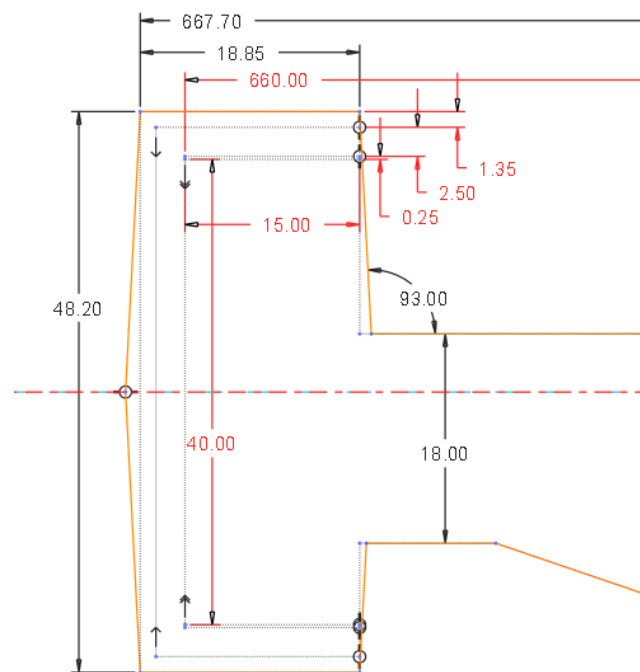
RMA and tolerance contribution to casting nominal dimensions. Base shape is shown with dashed construction lines and red dimensions, actual geometry with yellow lines and black dimensions. Some constraints are hidden for clarity.
